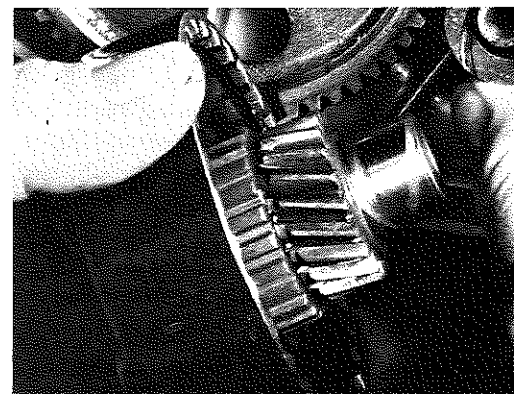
Pinion bushing position. Note open ends of oil grooves face engine case.
